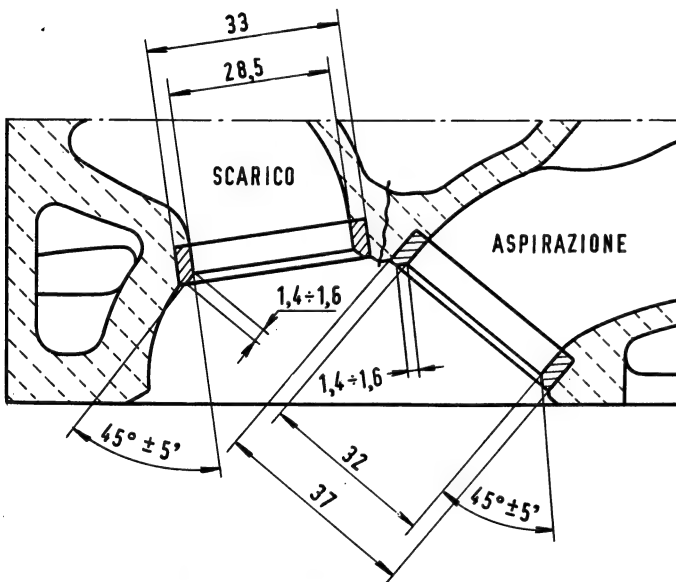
Critical dimensions (in mm) and angles of intake and exhaust valve seats. Engine 115 C.005.
